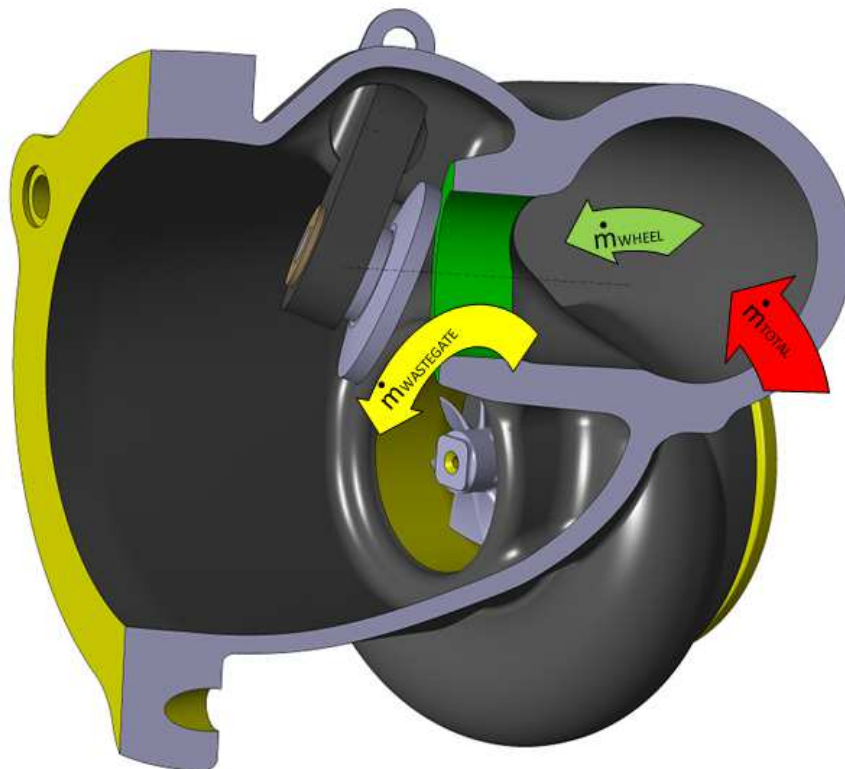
Section view D-D through turbine housing with horizontal bushing axis
